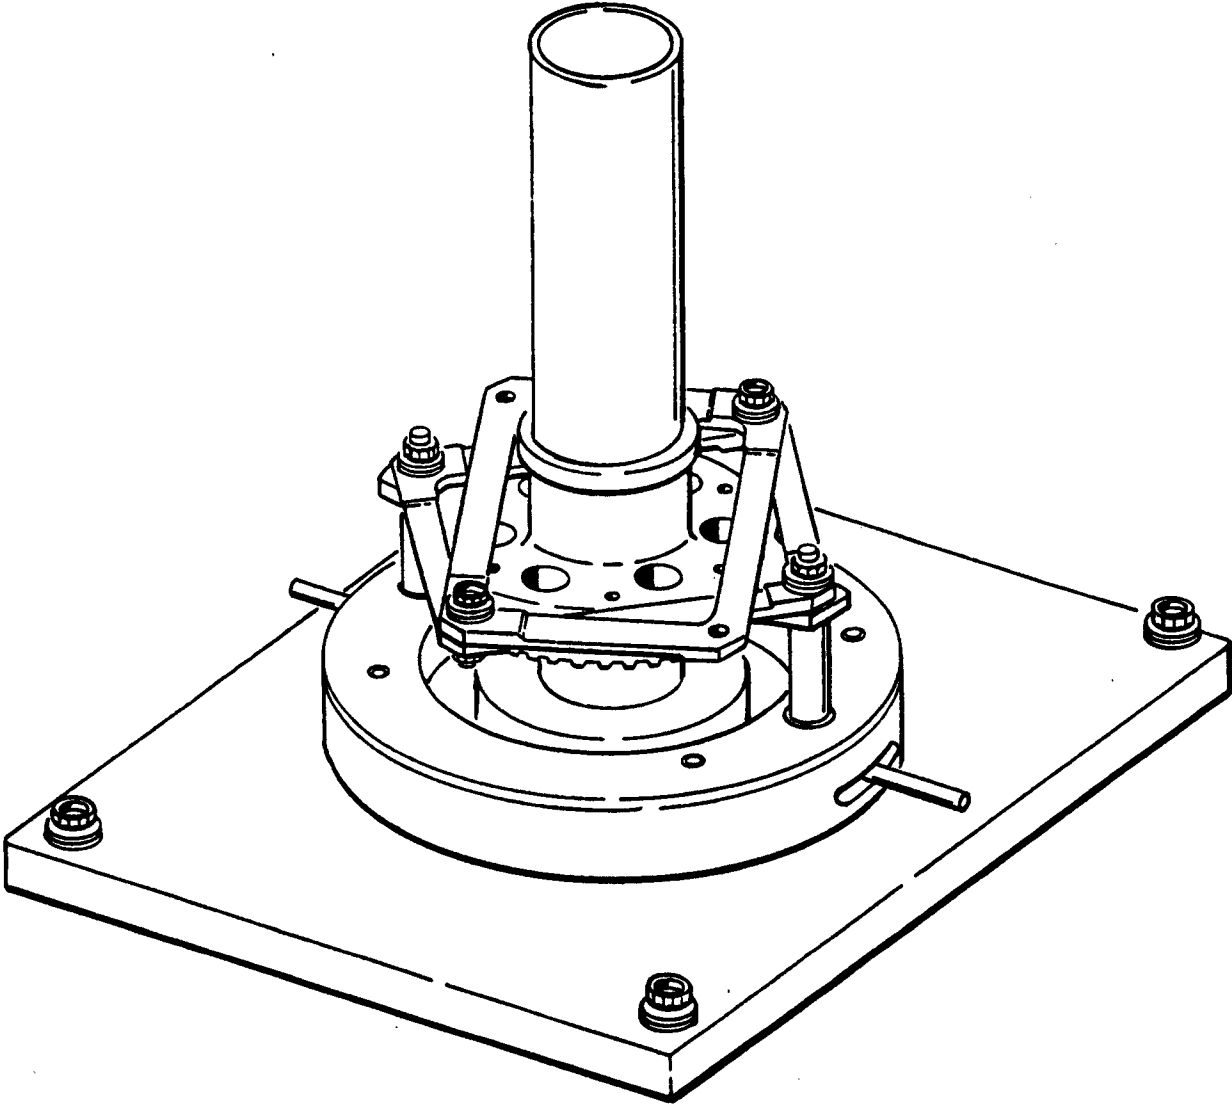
End Fitting Subassembly on Assembly Fixture
